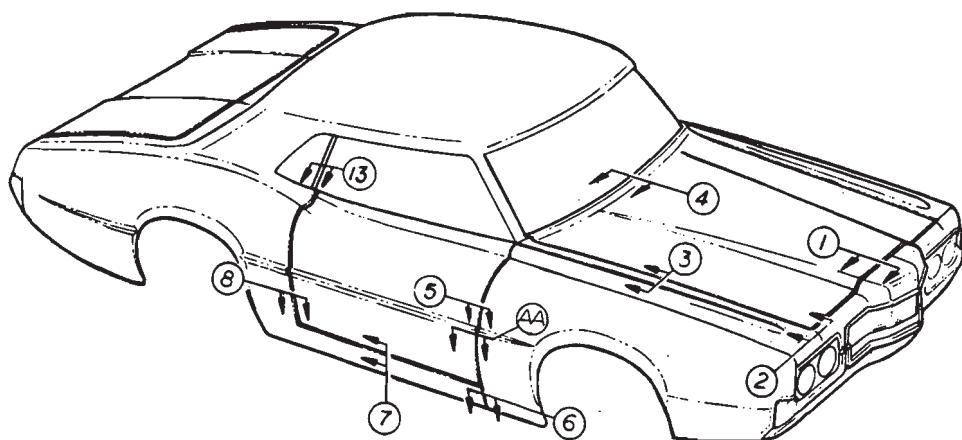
Mercury and Meteor Body Clearance Dimensions
